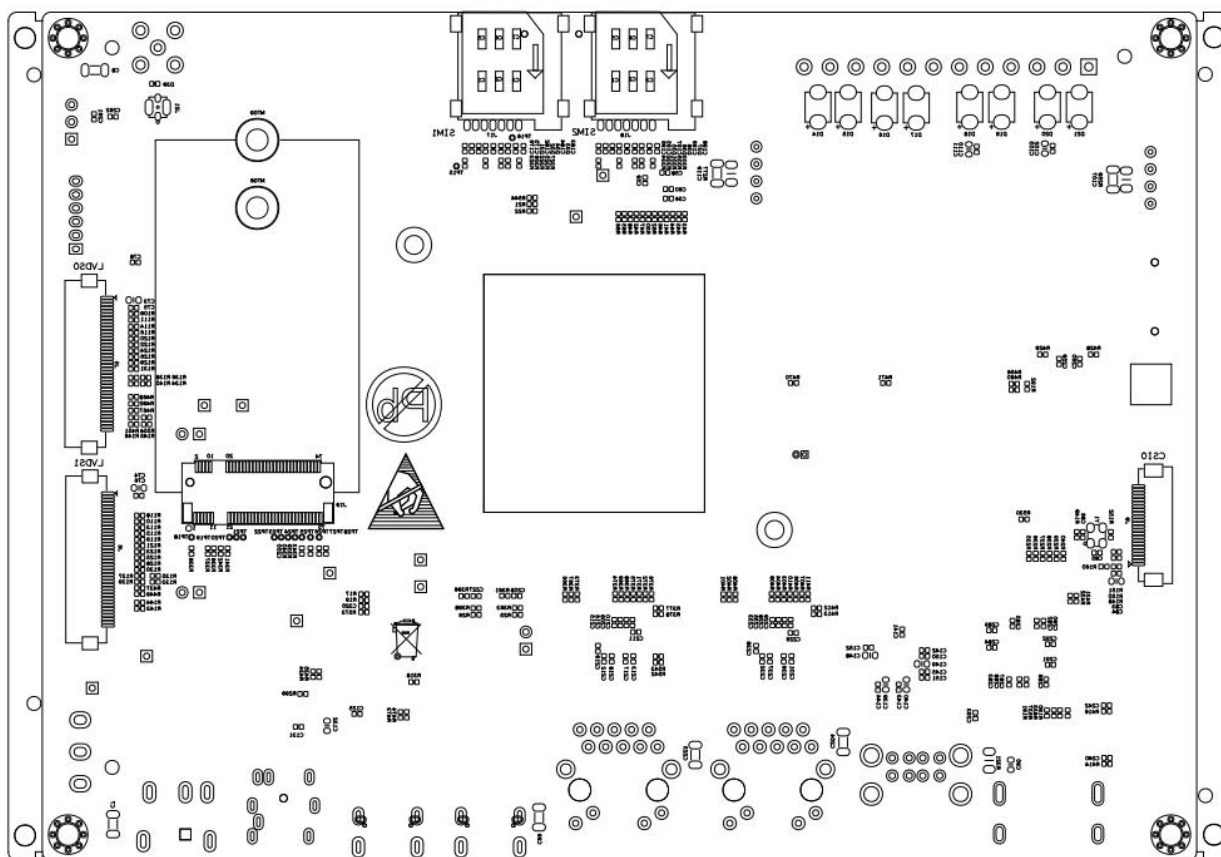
2 MYD-YM62X Interface Layout Bottom View
